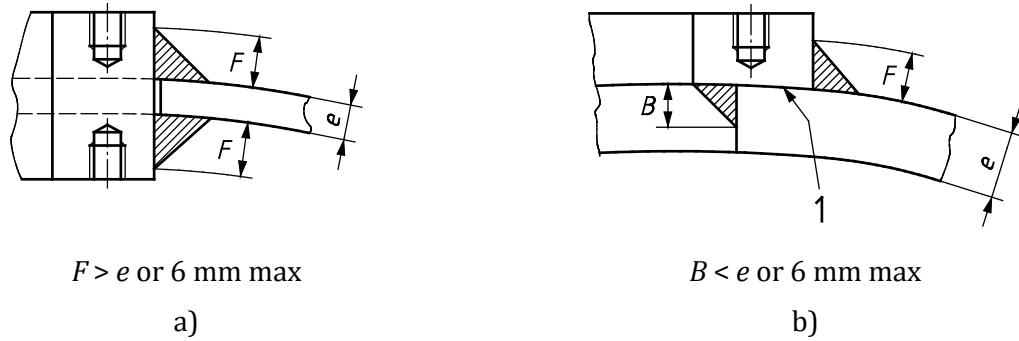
Typical weld details for connection of set-on mountings
